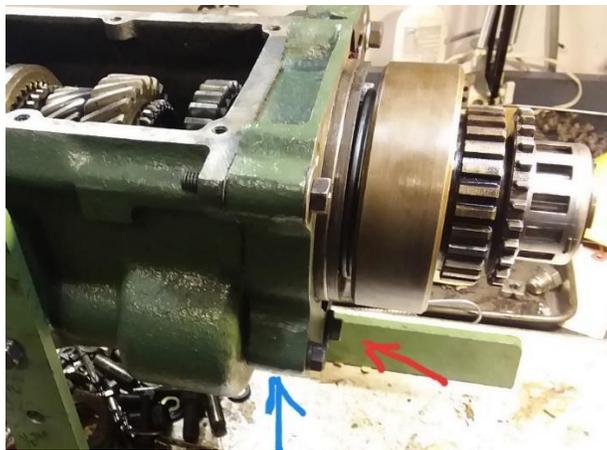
Transmission with Adapter Plate prior to Spring and Plug insertion and Overdrive Housing attachment
